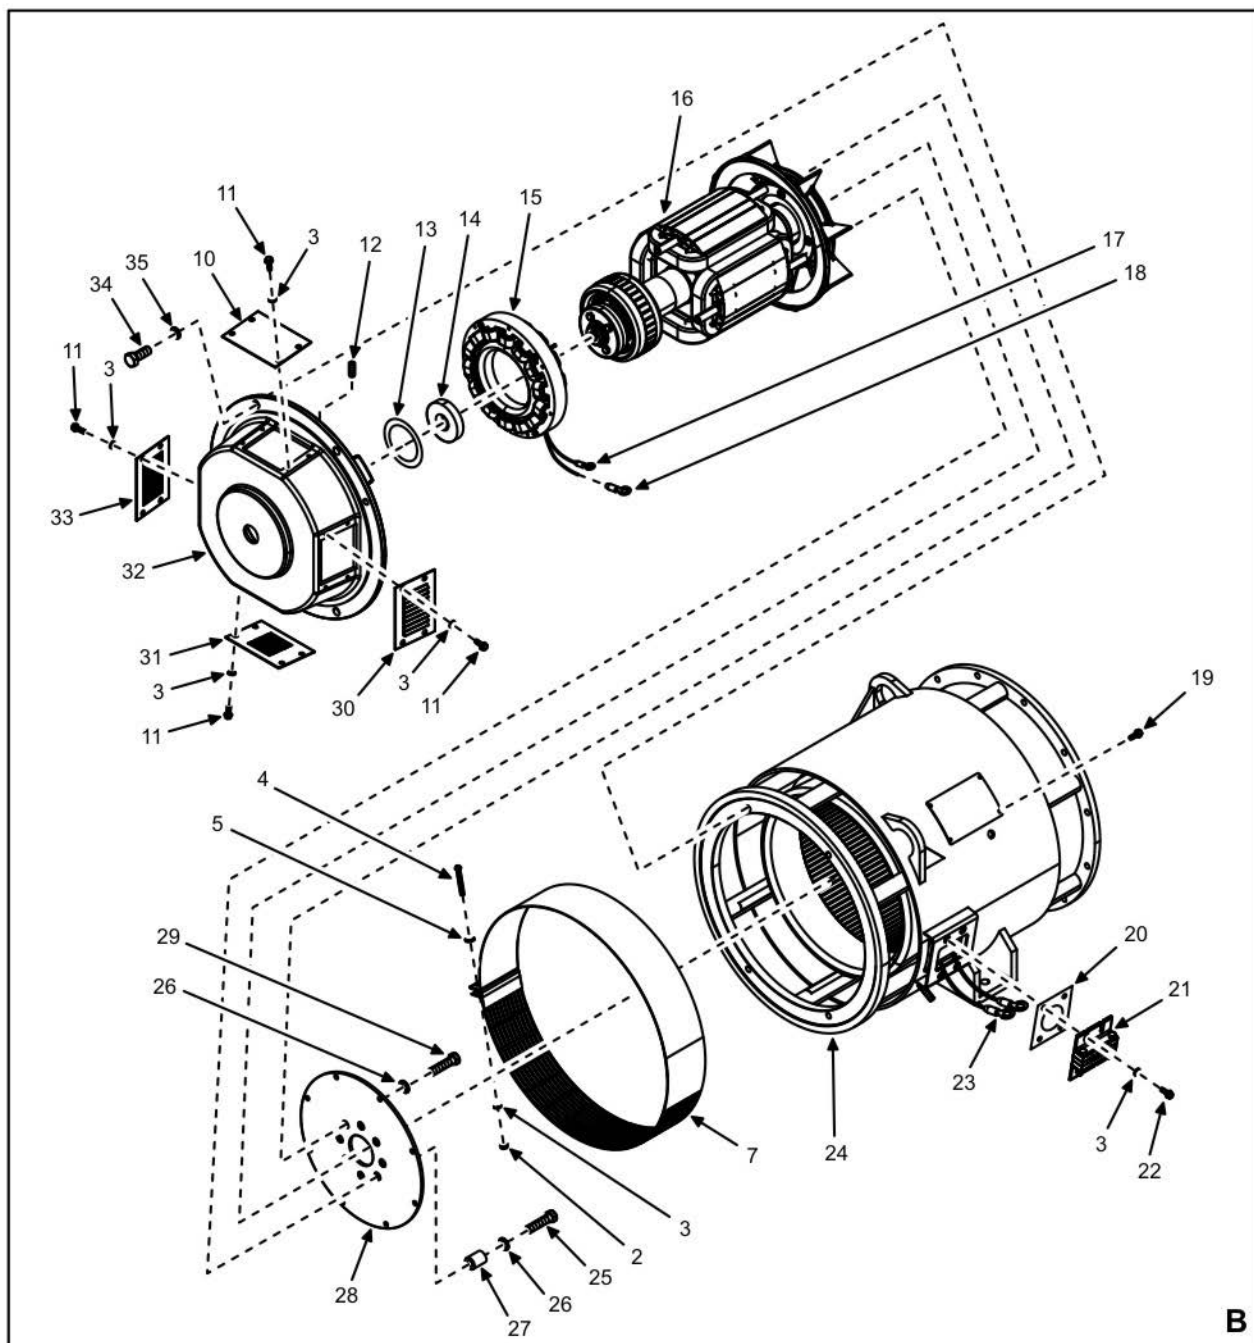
AC Generator Assembly, 400 Hz (Sheet 2 of 3).
